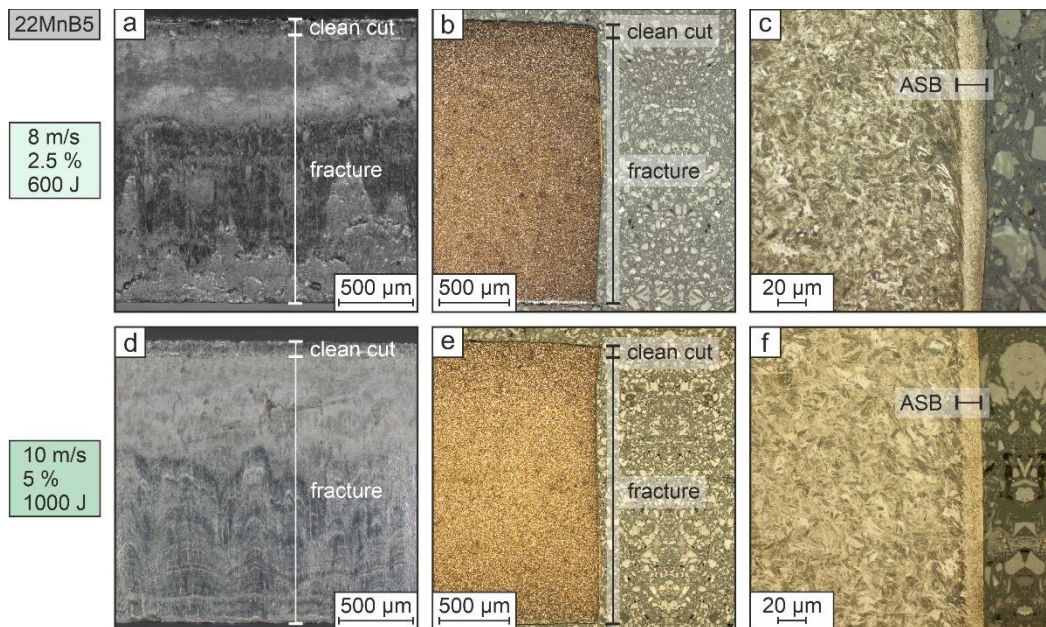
Optical micrographs of high-speed blanked surfaces of the used 22MnB5: (a–c) lower blanking speed and clearance, (d–f) higher blanking speed and clearance.
